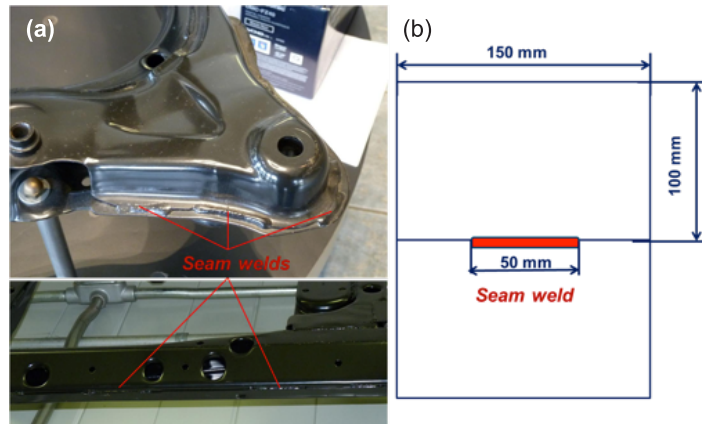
(a) Representative welding pattern used for assembling automotive body structures and (b) special weld fatigue specimen configuration.
